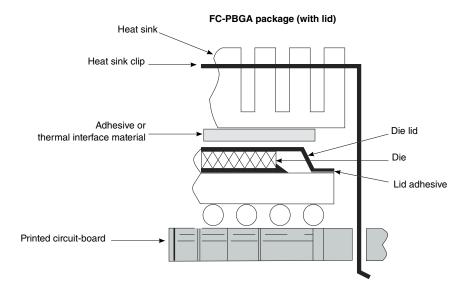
Package exploded, cross-sectional view-FC-PBGA
